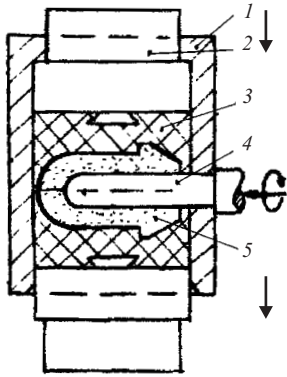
Mold for quasi-isostatic molding of pot condenser: 1) matrix; 2) punch; 3) detachable press buffer; 4) core with built-in vibrator; 5) article molded.
